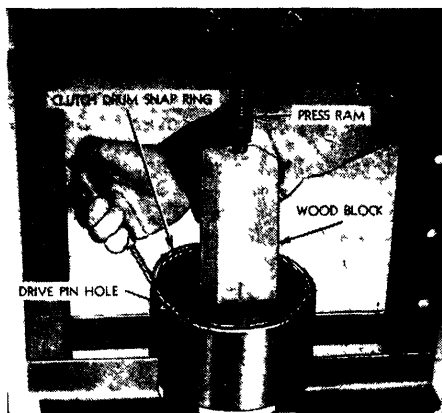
Install clutch drum and piston over planet carrier into drum, being sure clutch release springs enter into recesses of piston. Then lift front unit off planet carrier, place in press and press clutch drum below snap ring groove. Install snap ring with gap positioned between two drive pin holes. Snap ring must be well seated into groove to prevent interference with ledge on drum. Raise press and remove assembly
